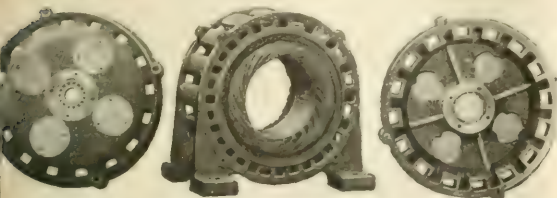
VIEW OF MOTOR WITH END COVERS REMOVED.
